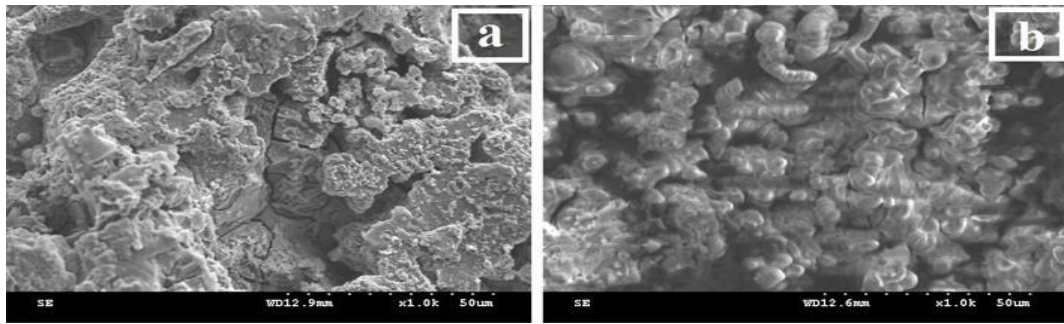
Constant applied tensile load (CL) stress corrosion cracking fracture surface of Al-12Zn-3Mg-2.5Cu alloy + 0.5 % SC, a) Cast and b) Solutionized (450°C-24hrs)
